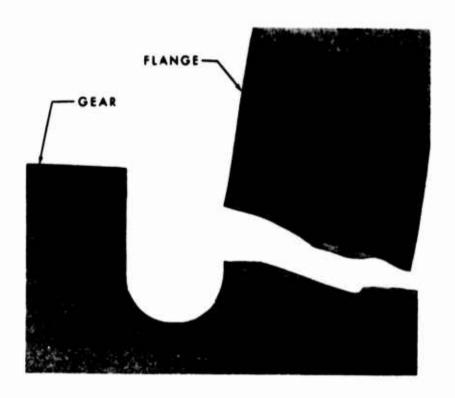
Gear/Flange Separation - Second-Row Pinion.
